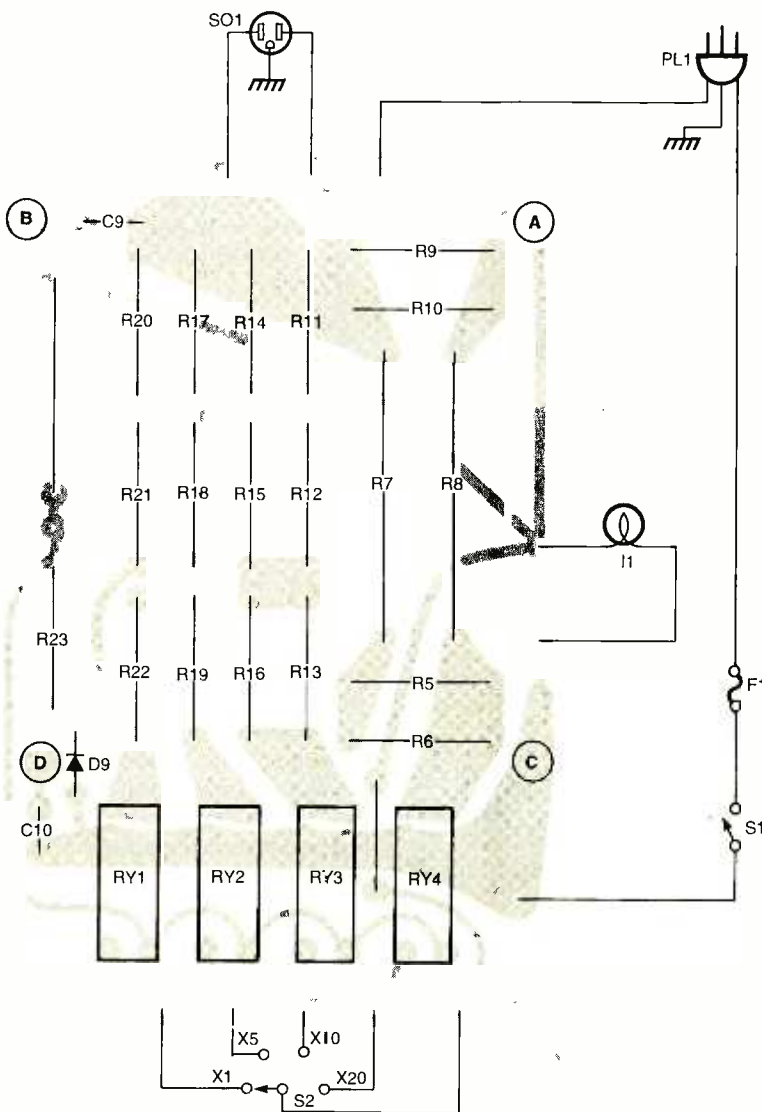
Assemble the attenuator board guided by this parts-placement diagram. Start by installing a jumper wire between RY3 and RY4, followed by the four banks of high-powered resistors (R5–R22) and the capacitors (C8–C10), and the lone diode (D9). Once those components are in place, mount four 3/4-inch threaded spacers at the points labeled A, B, C, and D using appropriate hardware.
